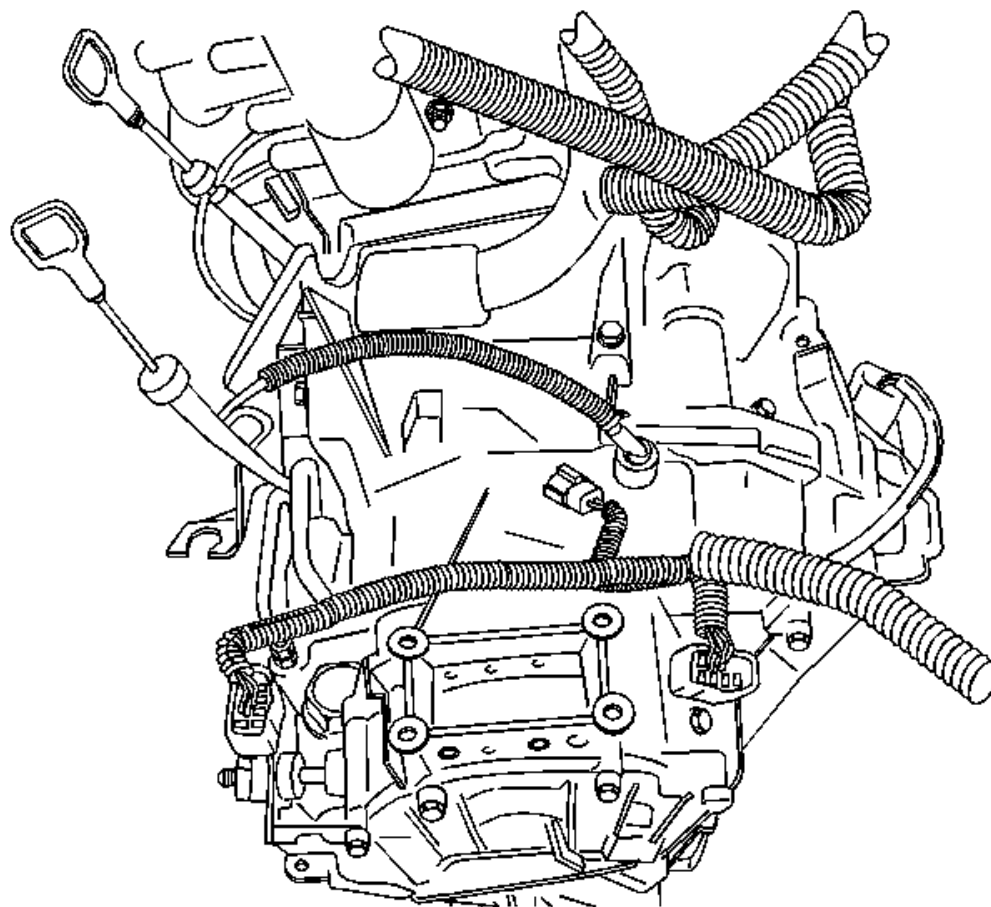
Cables And Wiring Harness Related To Automatic Transaxle
